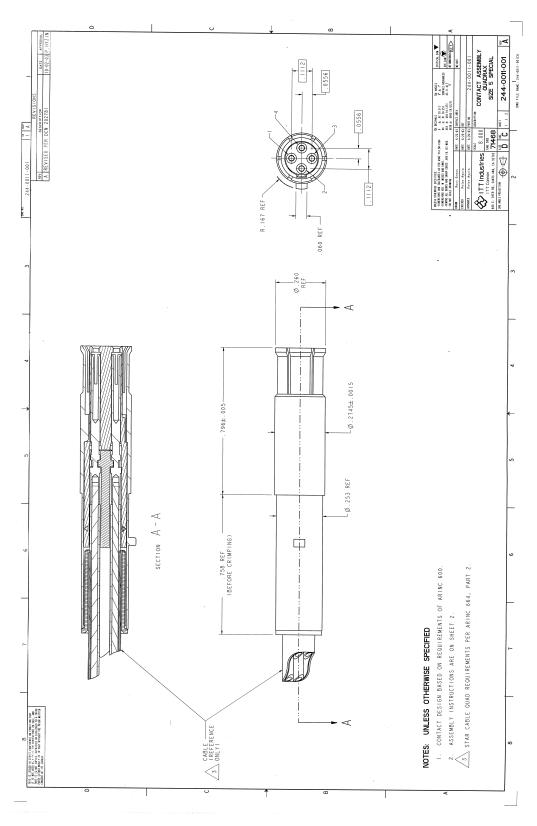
Contact Assembly: Quadrax Pin size 5 special: ITT Cannon 244-0011-001
